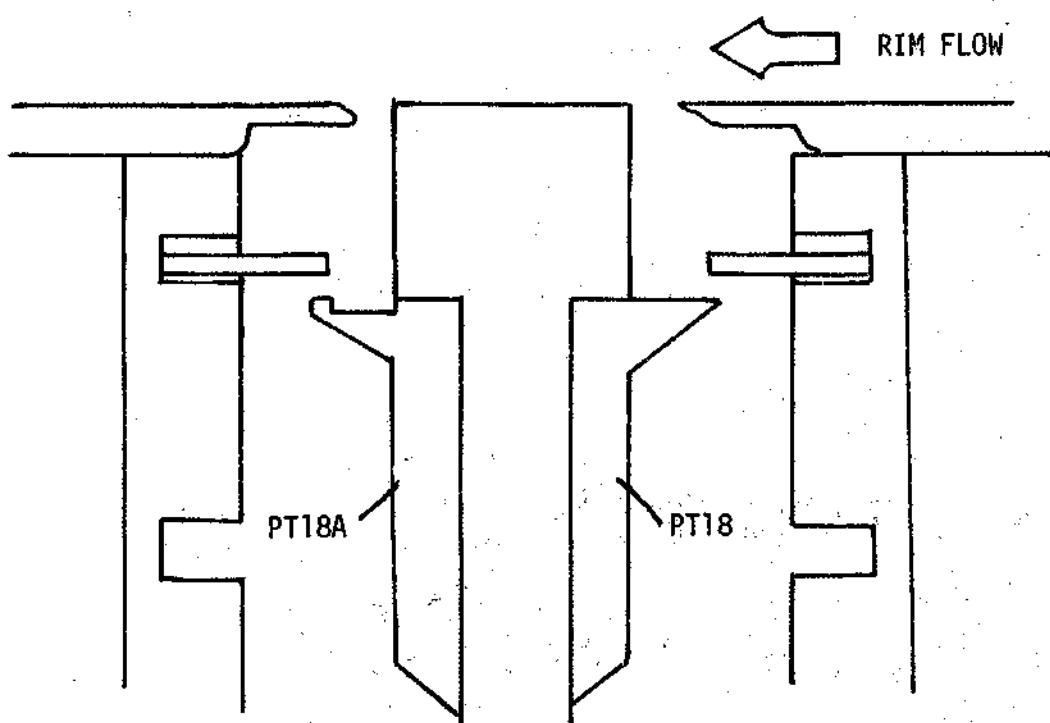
B. Rotor Seal Geometry, Test Series II.
